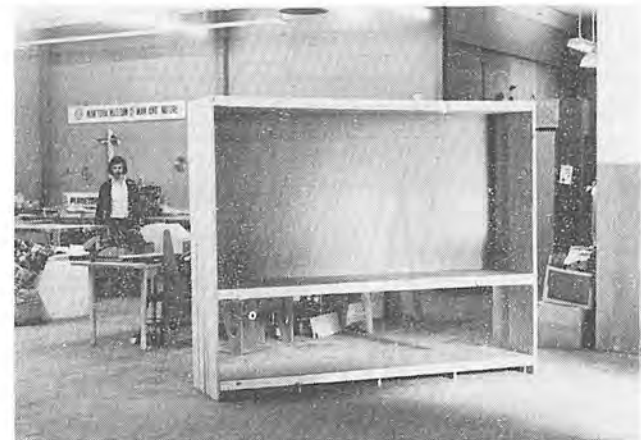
Front view of partially assembled case showing pegboard back, and storage space underneath
